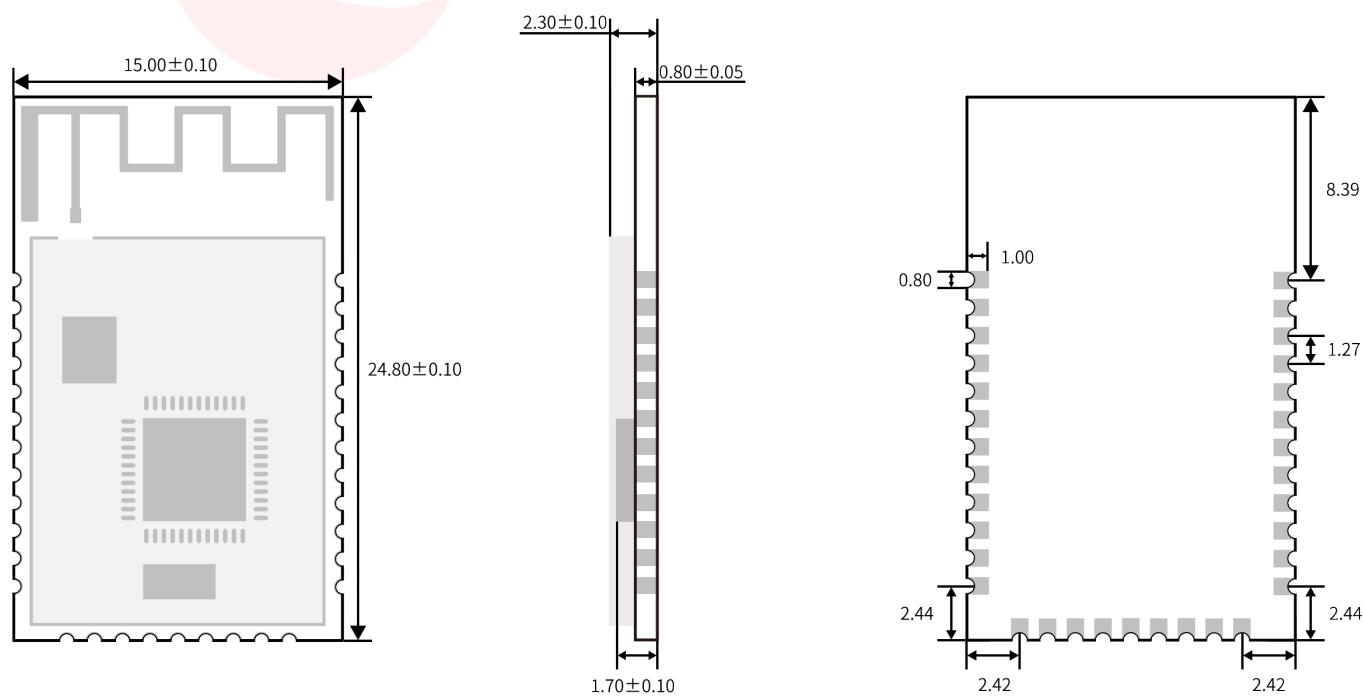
Recommended PCB Footprint of RF-BM-ND04 (mm)
